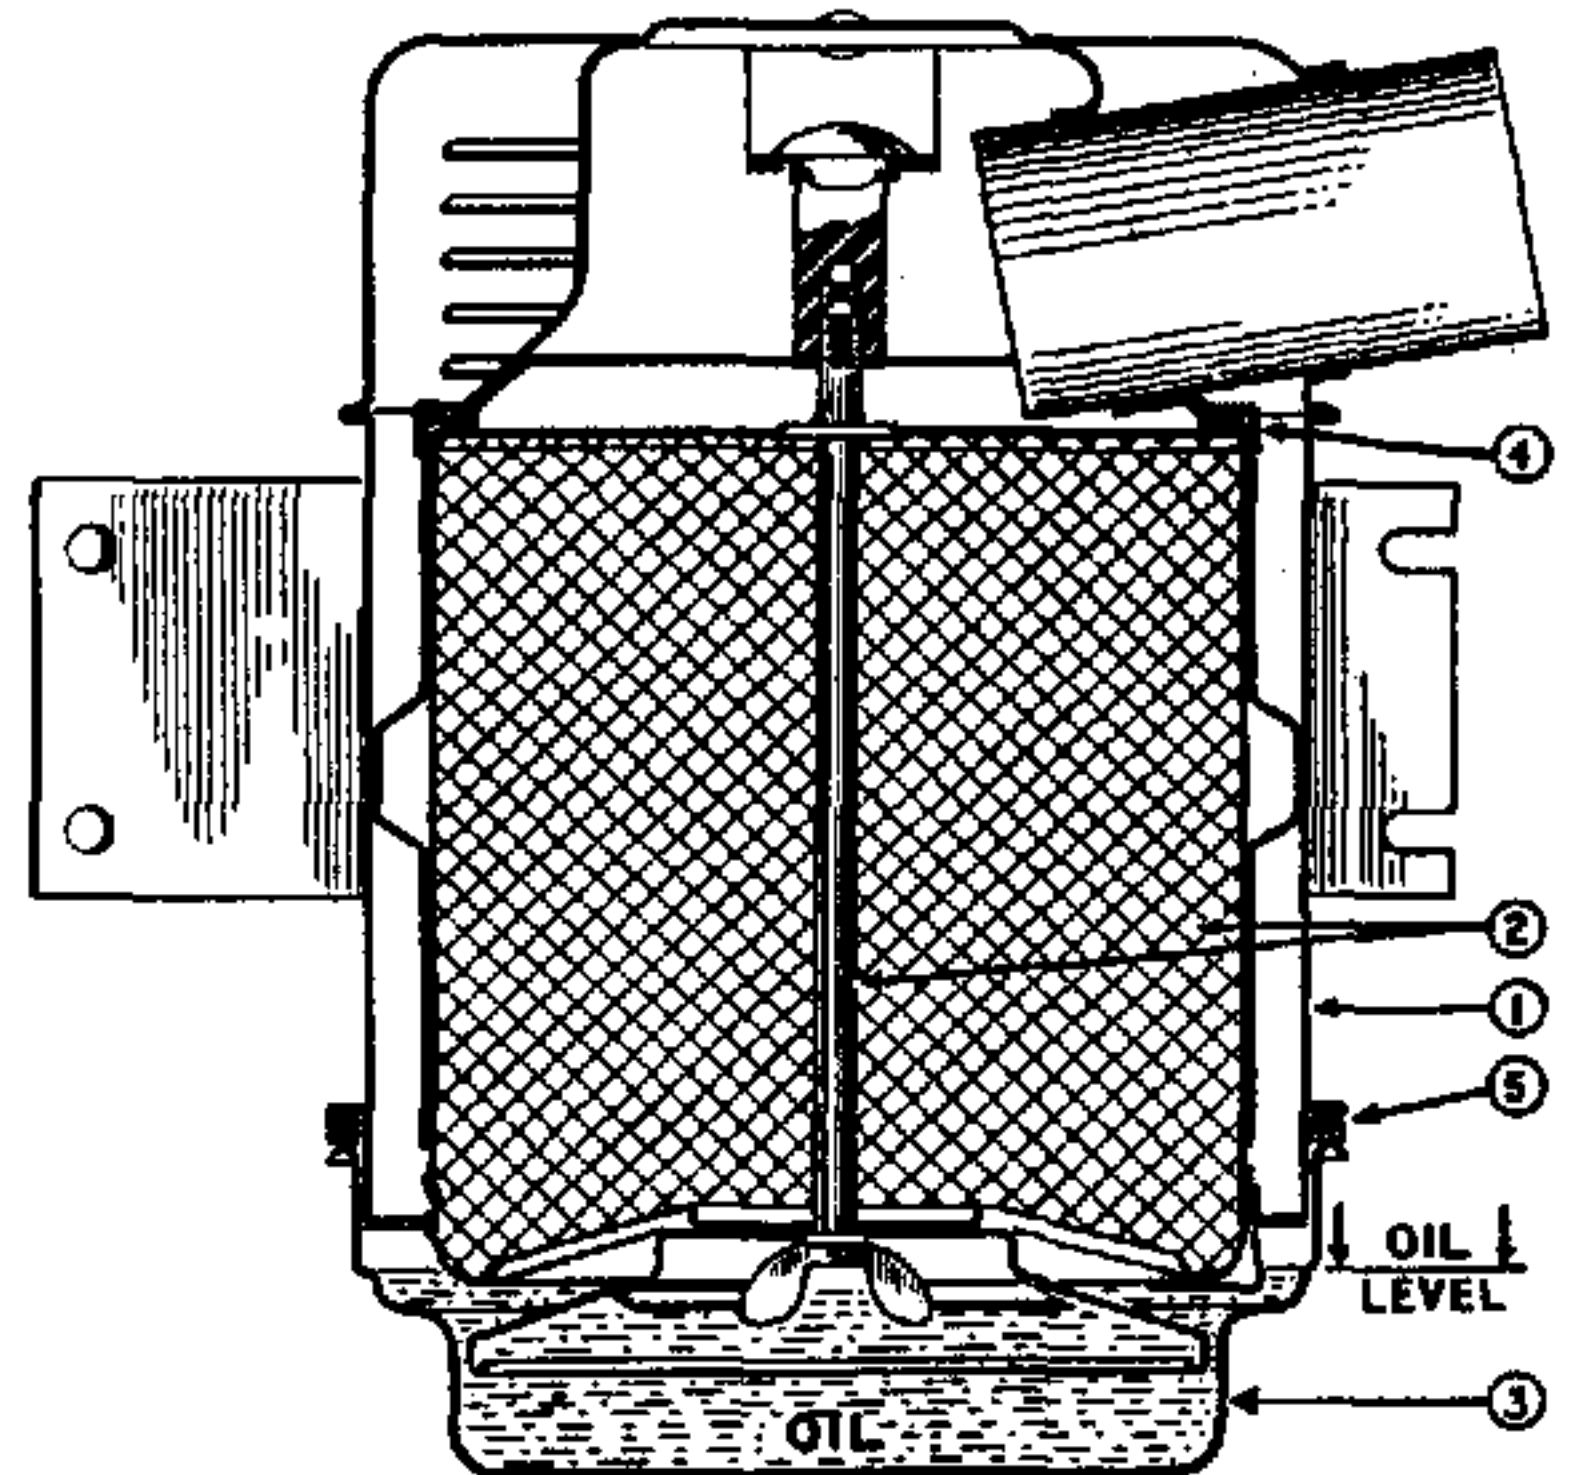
AIR CLEANER (HEAVY DUTY—OIL TYPE)
